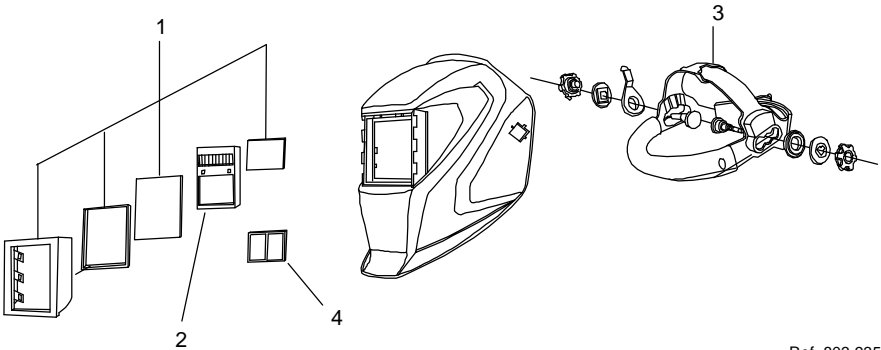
Explorer Series Auto-Darkening Welding Helmets
